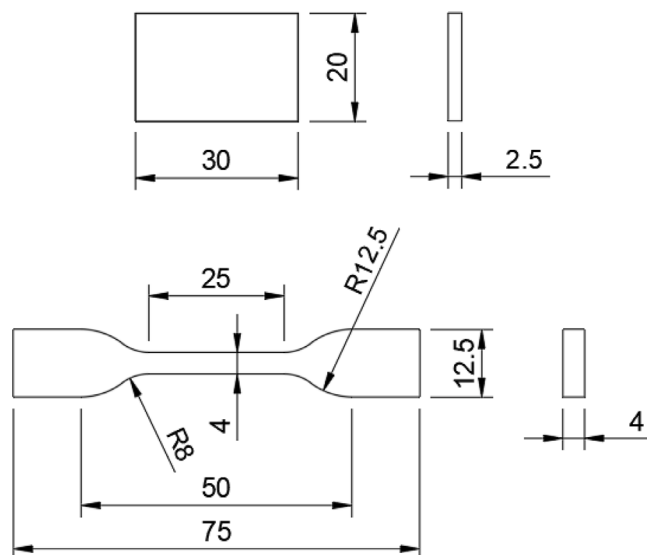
Geometries of the specimens used in the wear and tensile tests (dimensions in mm). Top: wear test specimen; bottom: tensile test specimen.
